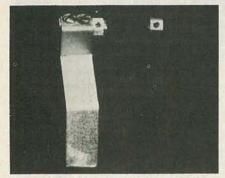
DETAILS OF HINGE used in fingertype end-effector assembly.
